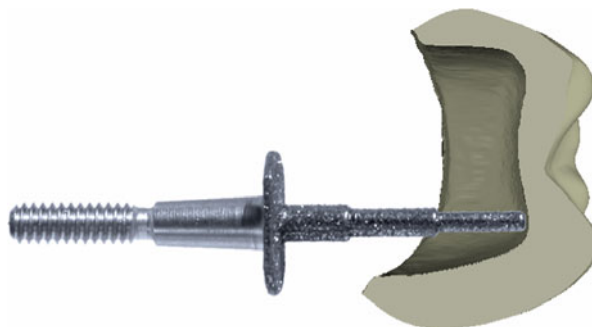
Cross section shows a thin margin. This may lead to the material fracturing during milling. Followed by an open margin in the restoration
